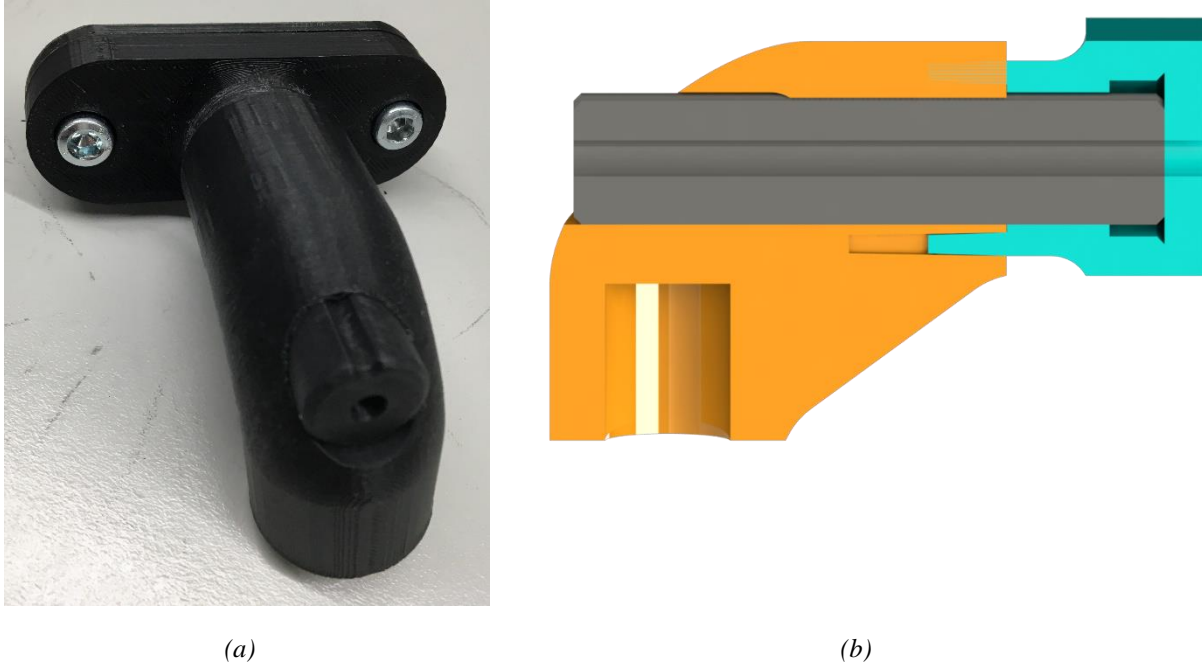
Dog clutch of iteration 3 (a) Real assembly of dog clutch system (b) A cross-section of dog clutch assembly
